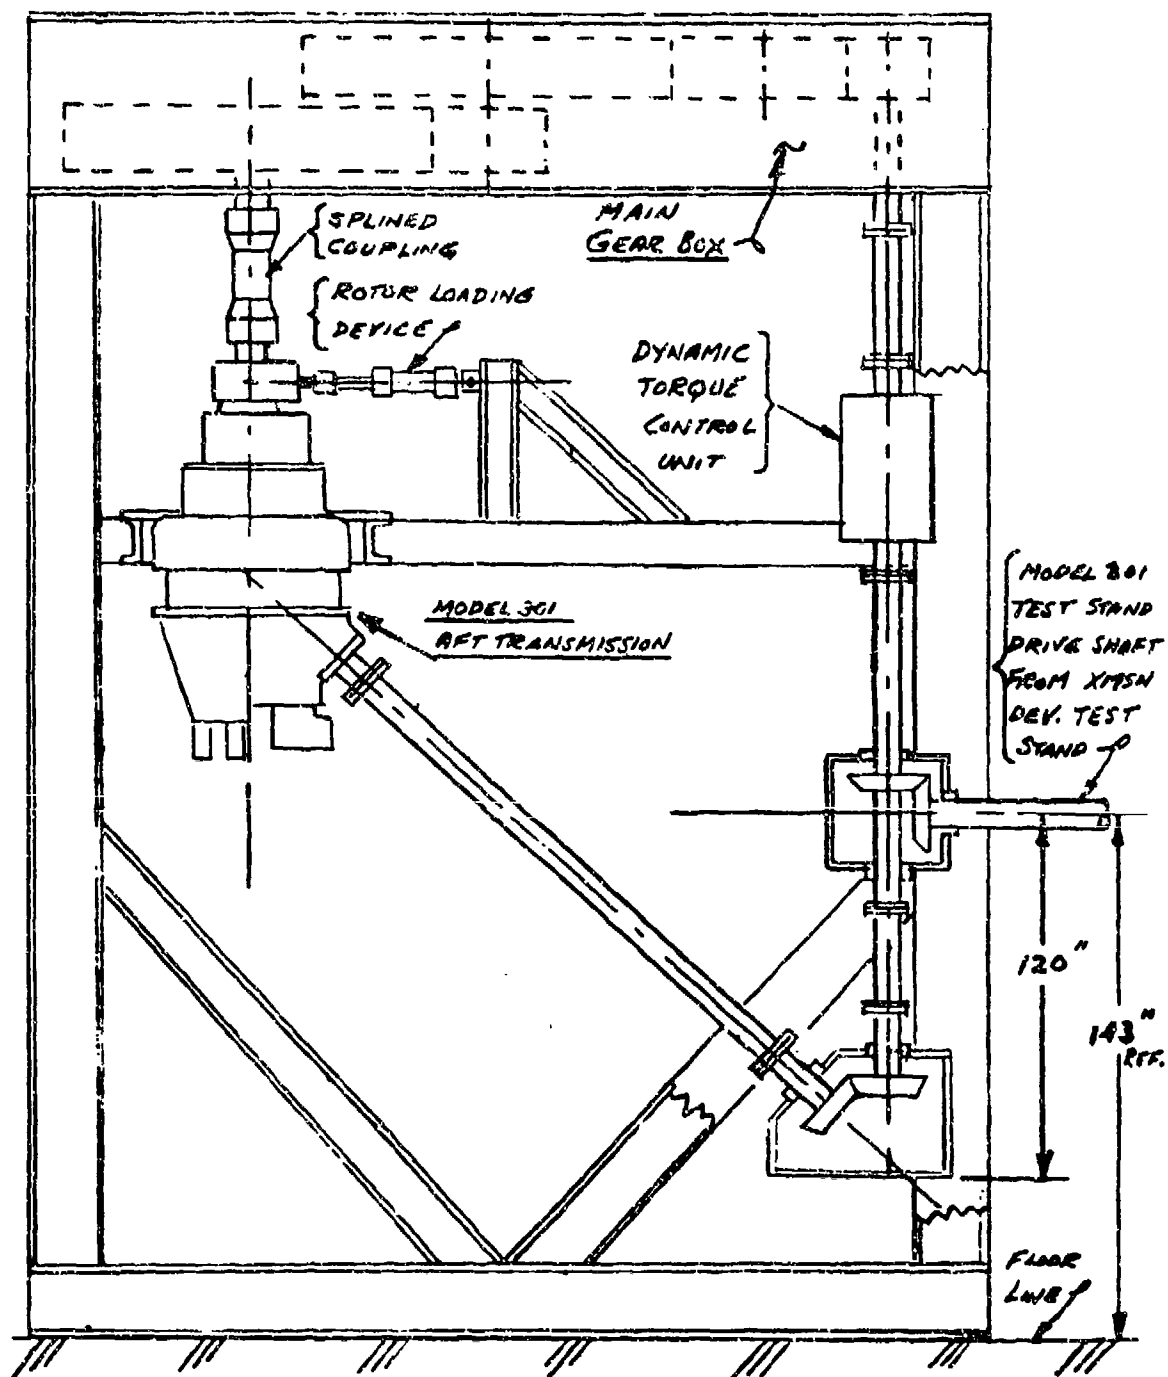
Model 301 Aft Transmission Test Stand Assembly.
